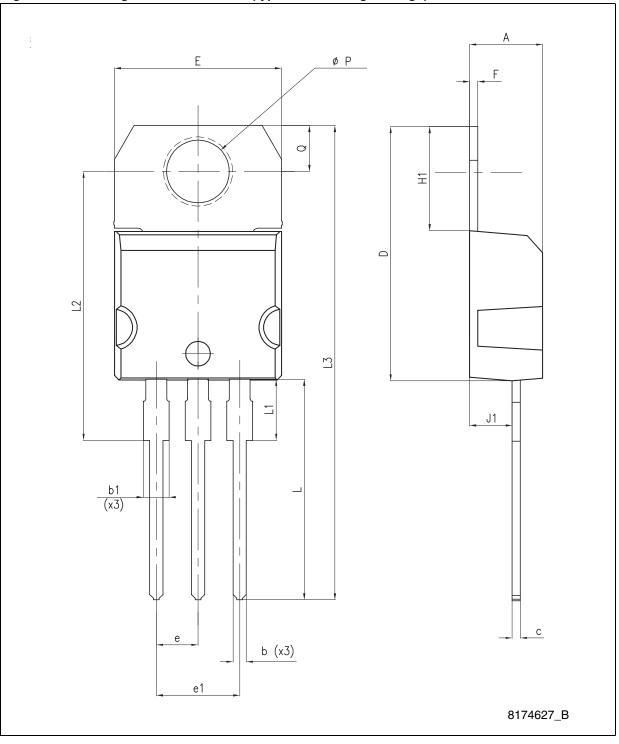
Drawing dimension TO-220 (type STD-ST Single Gauge)
